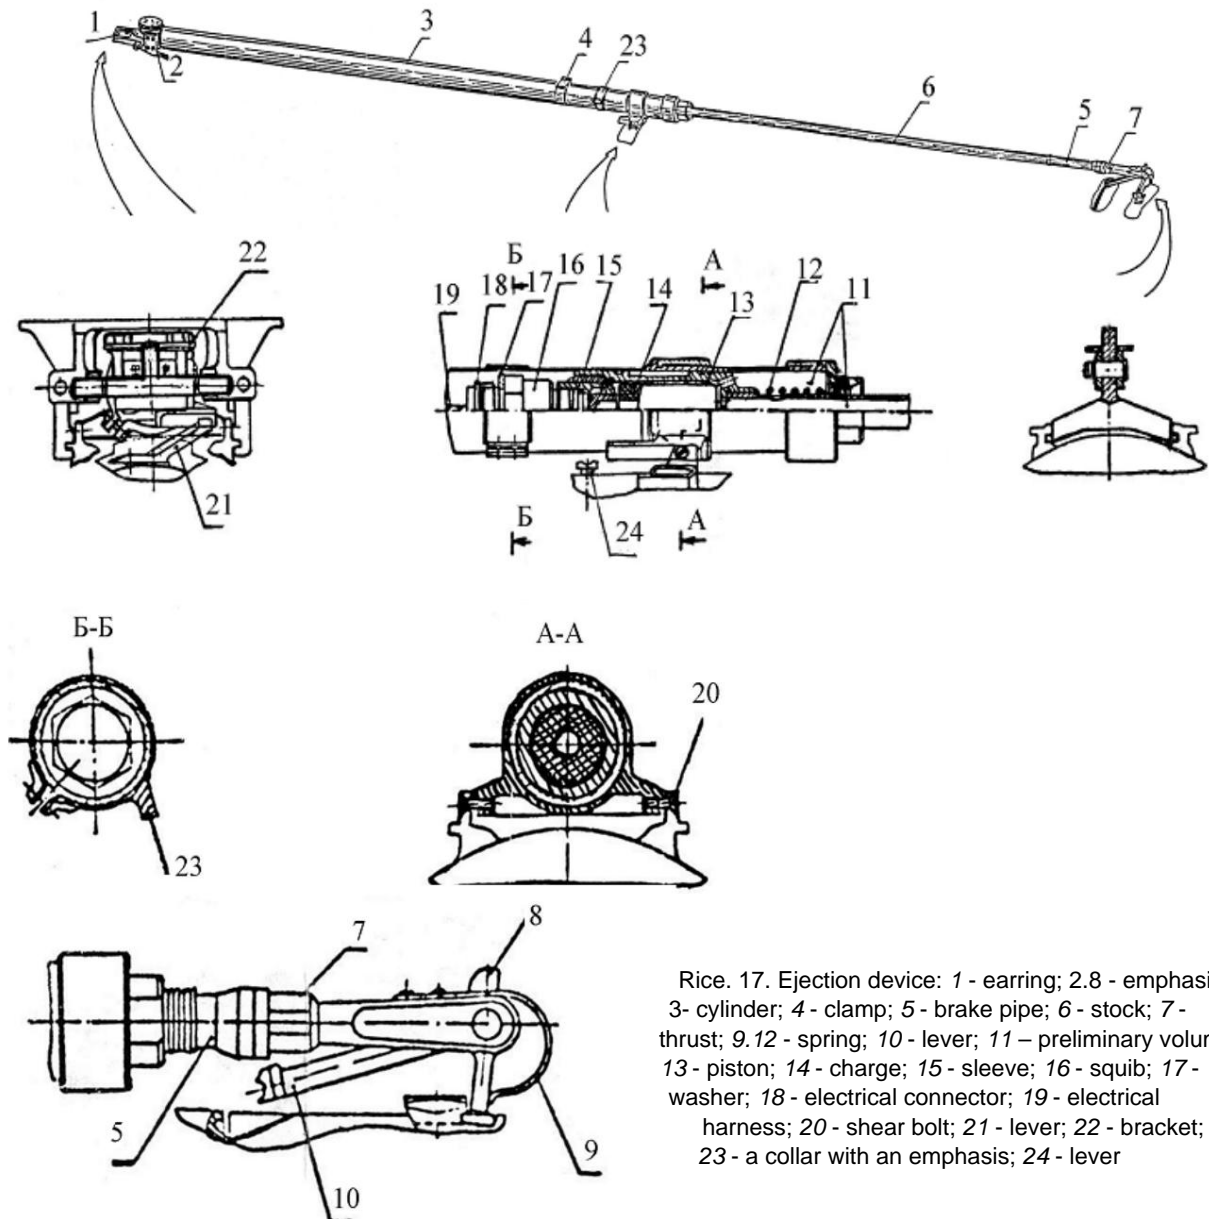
Ejection device: 1 - earring; 2.8 - emphasis; 3 - cylinder; 4 - clamp; 5 - brake pipe; 6 - stock; 7 - thrust; 9.12 - spring; 10 - lever; 11 - preliminary volume; 13 - piston; 14 - charge; 15 - sleeve; 16 - squib; 17 - washer; 18 - electrical connector; 19 - electrical harness; 20 - shear bolt; 21 - lever; 22 - bracket; 23 - a collar with an emphasis; 24 - lever
